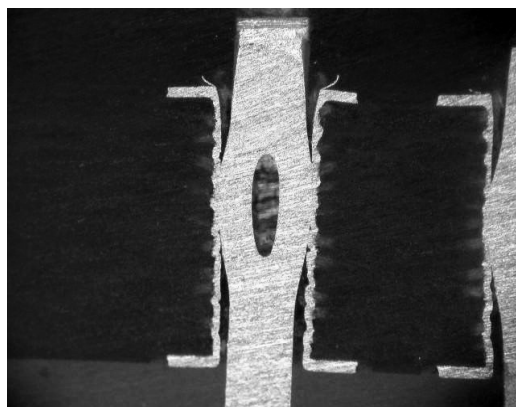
PCB Hole Damage-Cross-section perpendicular to the board surface.
